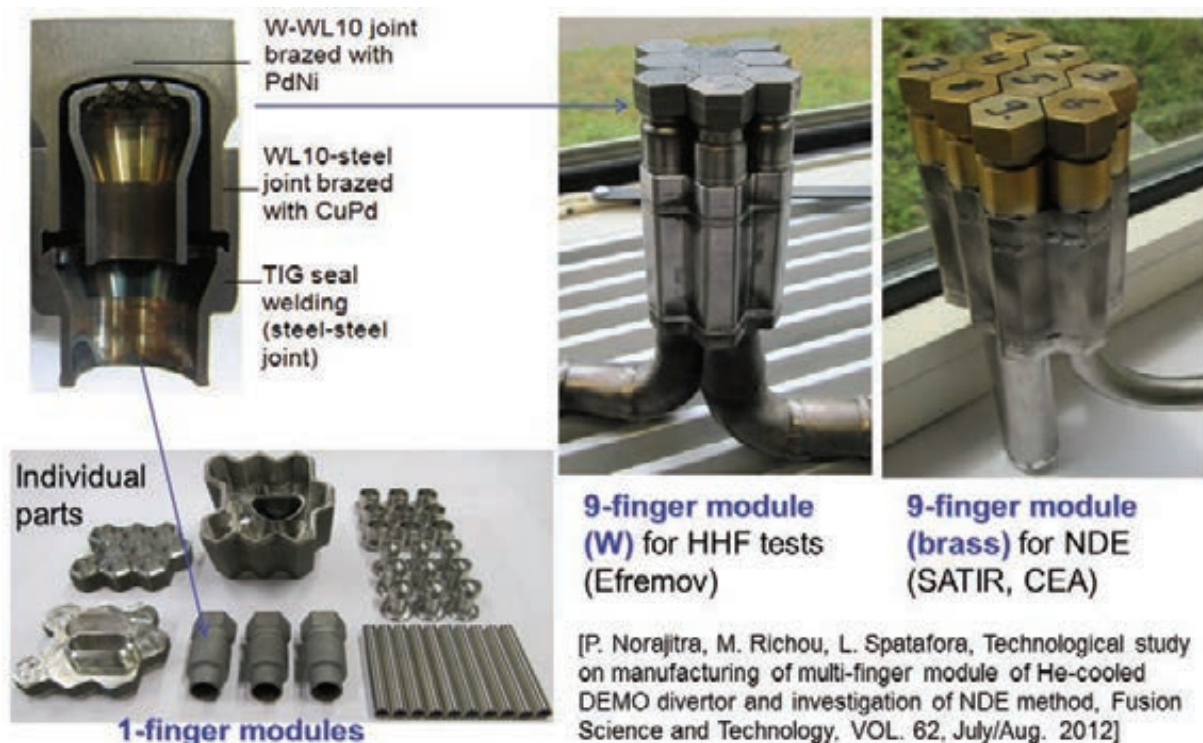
HEMJ – Finger modules manufactured at KIT.
